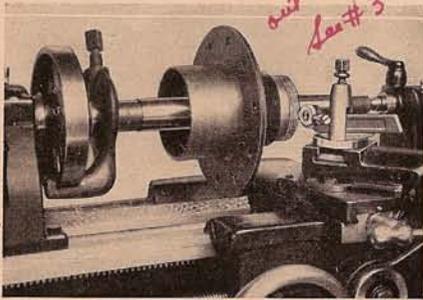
Re-threading a Damaged Front Wheel Hub Mounted on a Mandrel.
